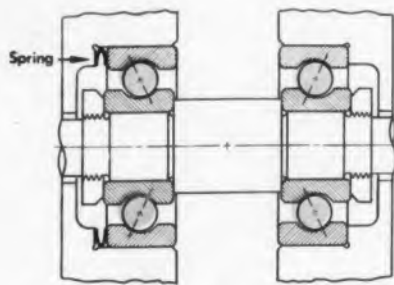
Spring loading method for axial adjustment removes unwanted axial and radial movement and is simple and fool-proof.
